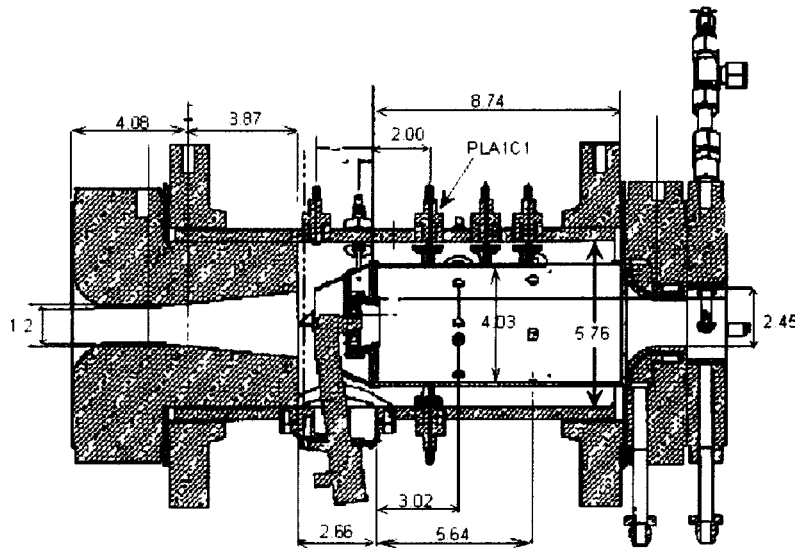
Single-nozzle combustor assembly, showing choked inlet (left) and outlet (right) boundaries, fuel injector and combustor liner. Unsteady pressure measurement (PLA1C1) located at 1.865 in. downstream of combustor bulkhead. Dimensions shown are in inches.
